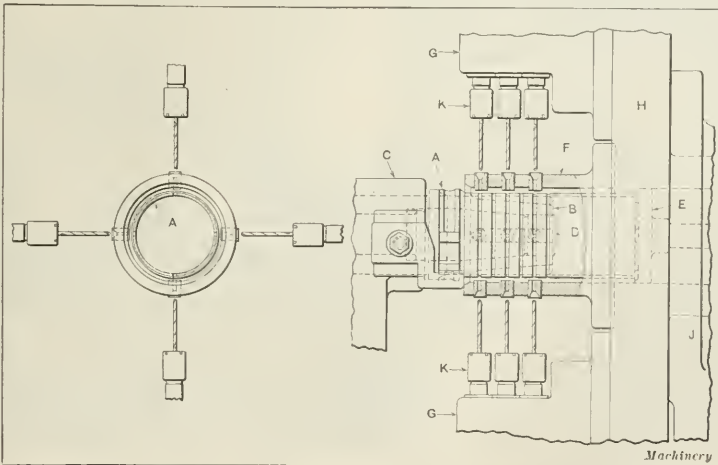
Section through Drill Jig showing Arrangement of Work-holding Arbor
